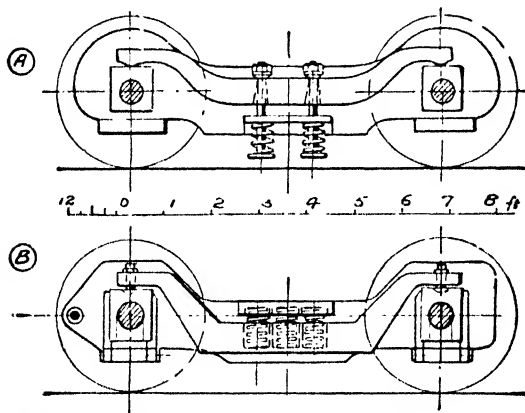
Equalising-spring Gear for Bogie Trucks.
